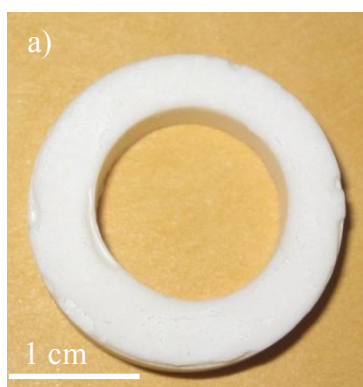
An injection molded alumina CeraSGel part that was formed using an EPDM foam insert and exhibited no cracking after binder burnout and sintering.
